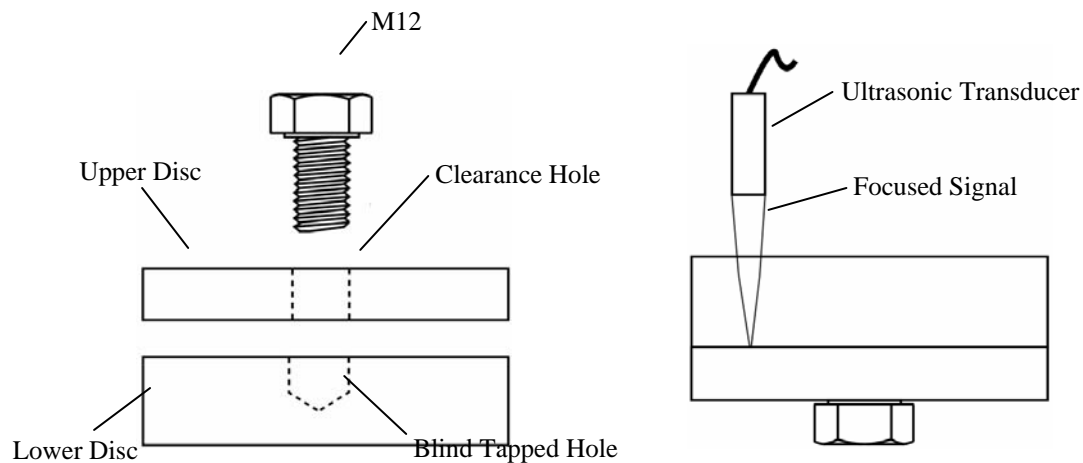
'Bolted Joint Specimen (a) Geometry and (b) Scanning Technique.'
